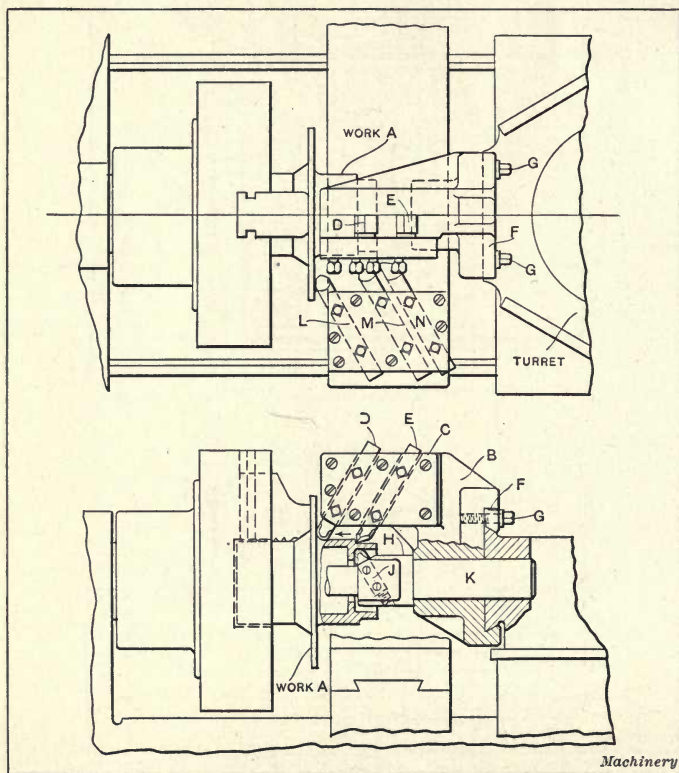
Multiple Tool-holder for machining Automobile Hubs
